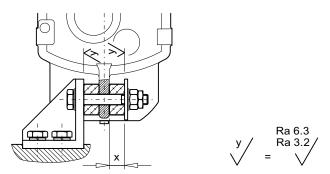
Mounting suggestion for torque arm on F.28, 38B - 188B
